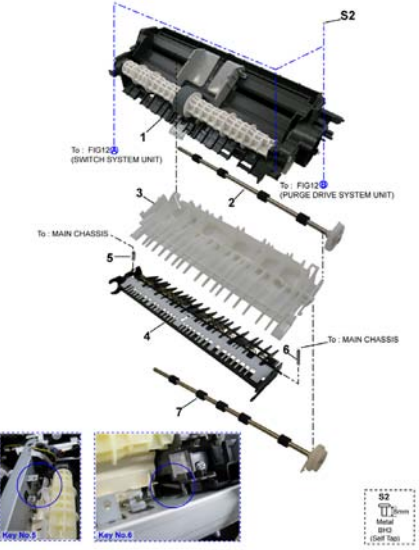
CARRIAGE UNIT & PRESSURE ROLLER UNIT
